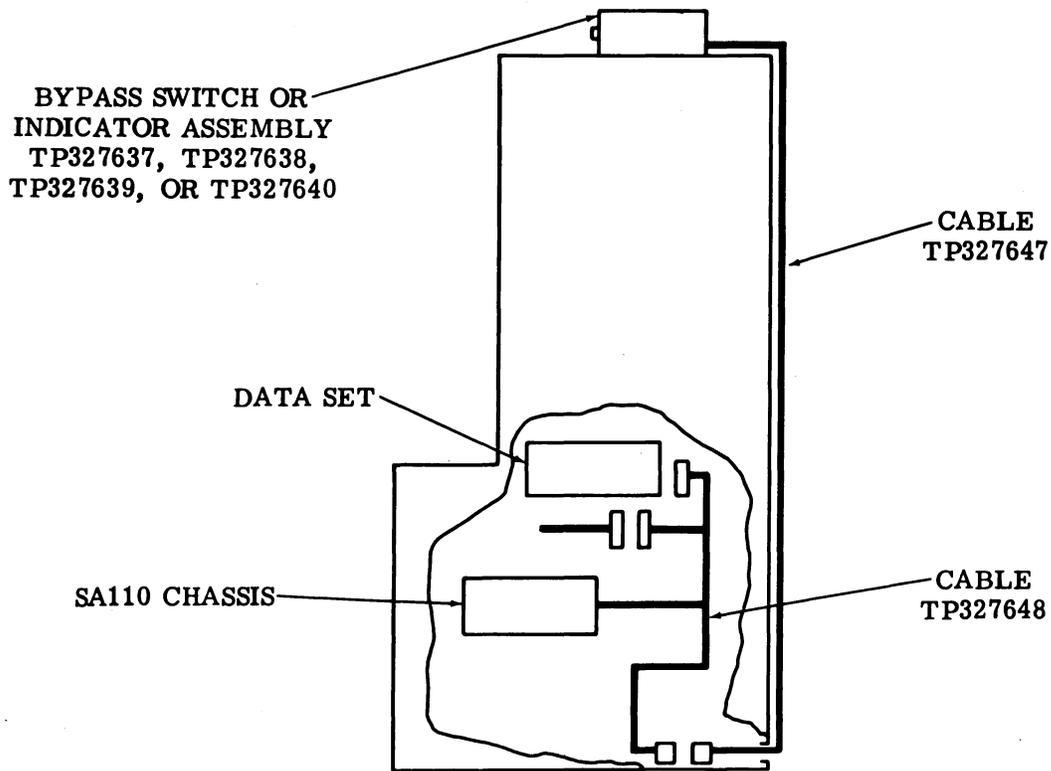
Location of SA110 Chassis and Bypass Switch or Indicator Assembly on DATASPEED Receiver
